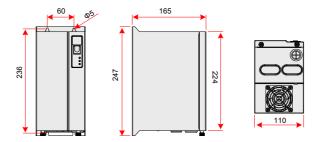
Mounting dimensions of MDBUN series braking unit (mm)
